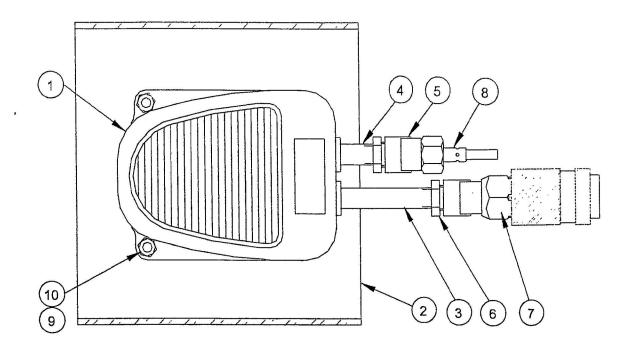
FOOT PEDAL ASSEMBLY - DWG-A-19007-1
